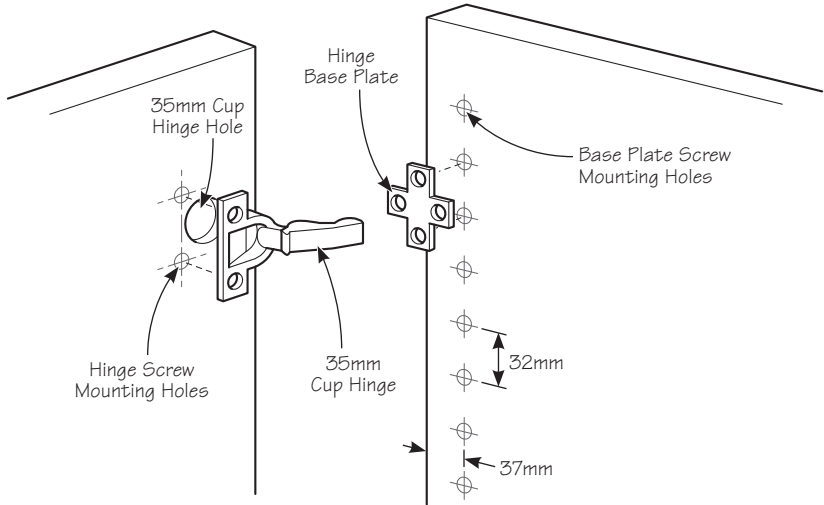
Jig locates cup and screw holes for 35mm cup hinges.
